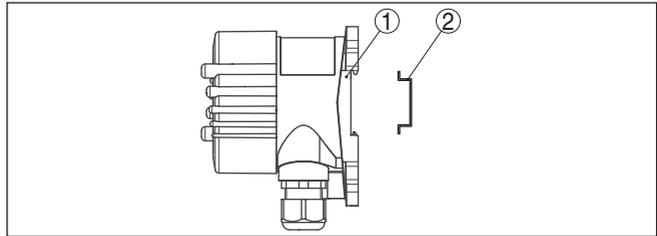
VEGADIS 81 with plastic housing for carrier rail mounting
